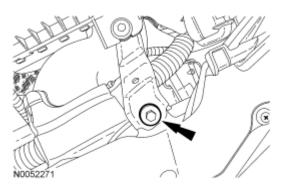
Locating Engine Breather Courtesy of FORD MOTOR CO.
